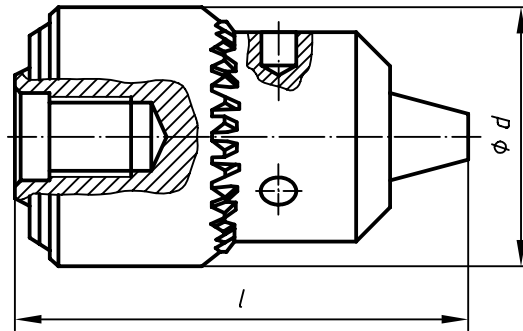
Three-jaw drill chuck — Internal thread mount type
